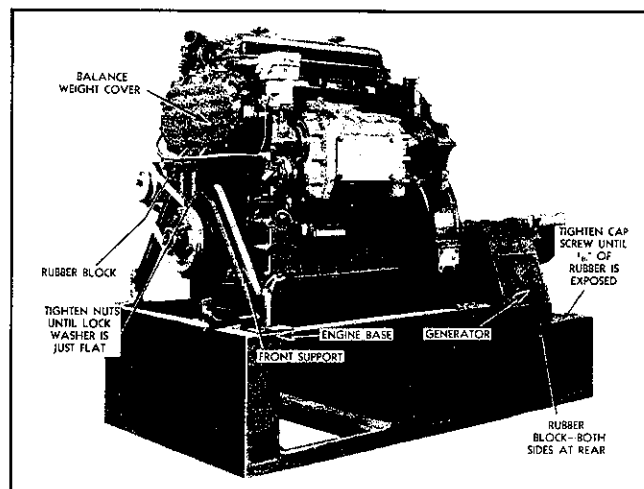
Rubber Engine Mounting—Used with Generator Sets.
